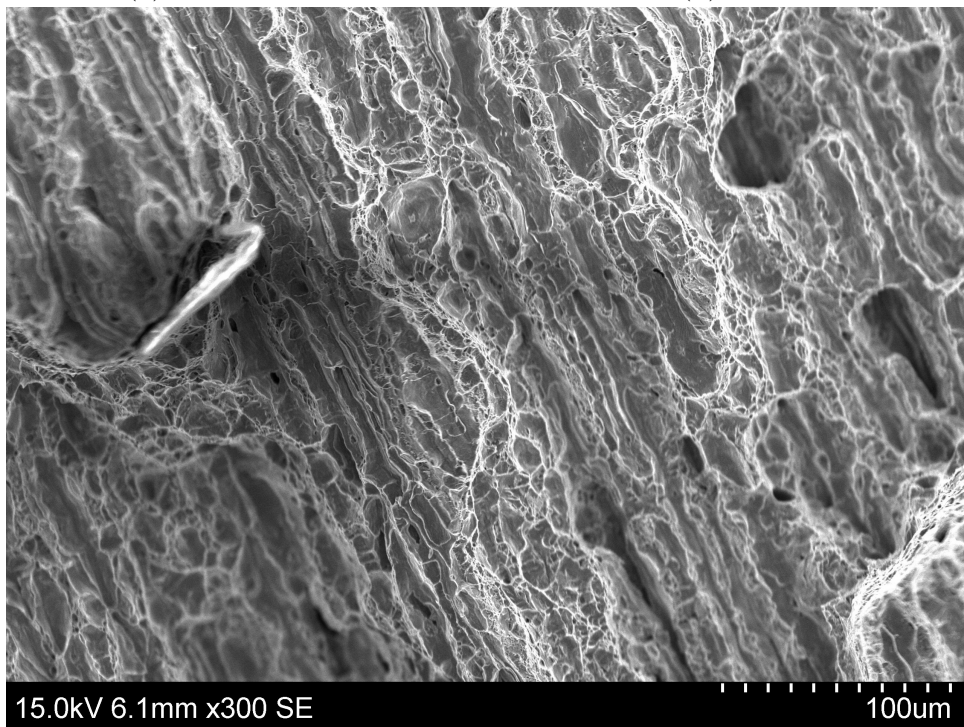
Overview of the fracture surfaces of Sample 5
